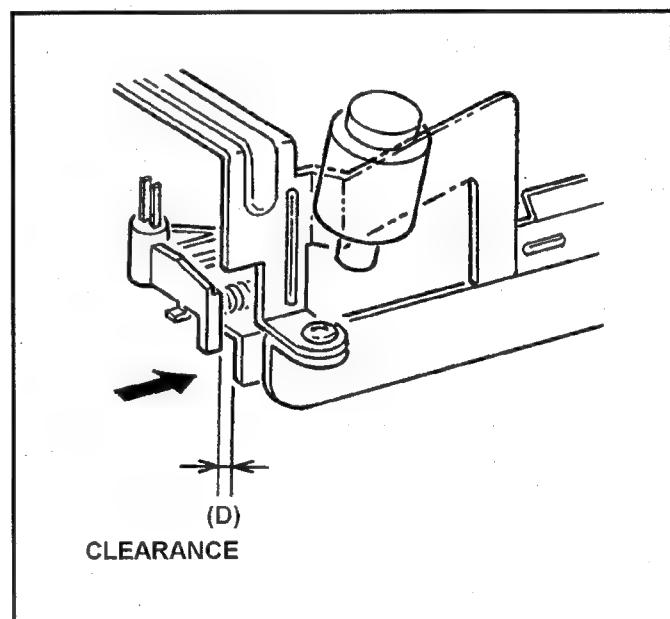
Cleaner Solenoid Position Adjustment
